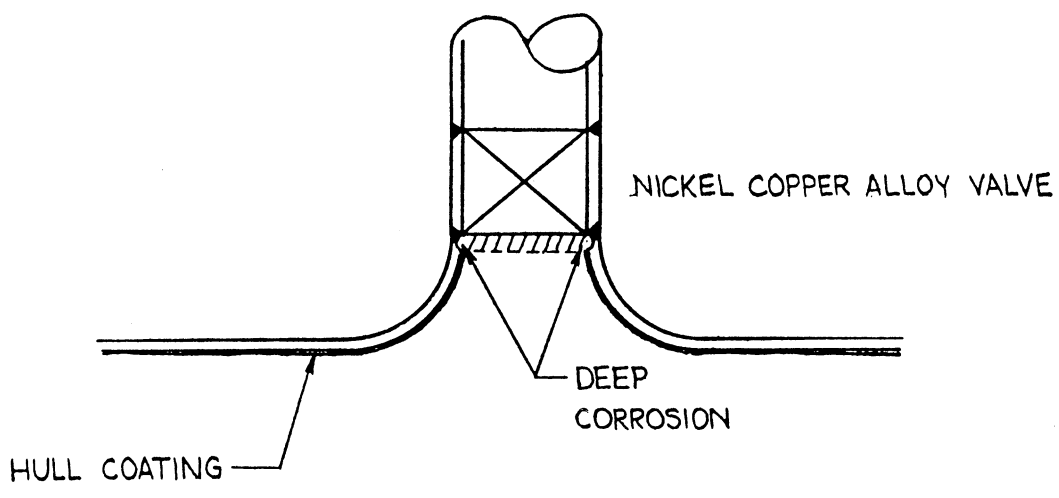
Deep corrosion in hull adjacent to nickel copper alloy to steel hull weld (seawater)
